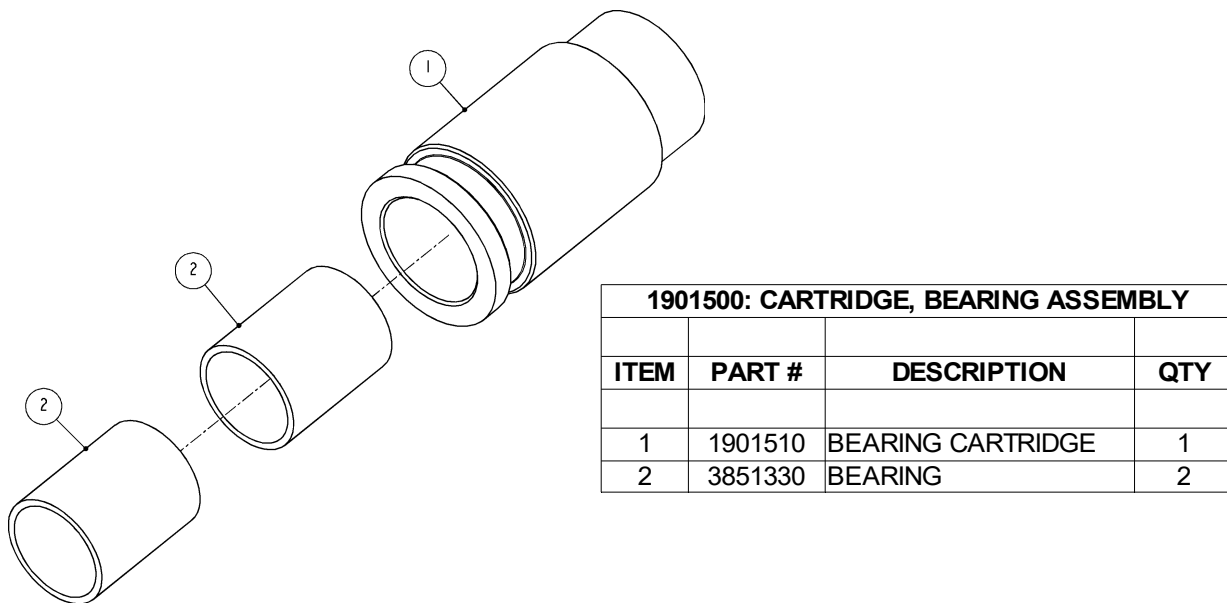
1901500: CARTRIDGE – BEARING ASSEMBLY
